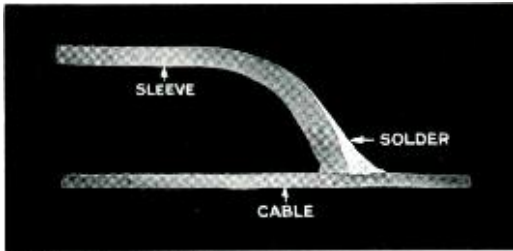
B—Section of a cable joint using the new fillet technique of the "Victory Joint" which saves more than two-thirds of the solder formerly used
